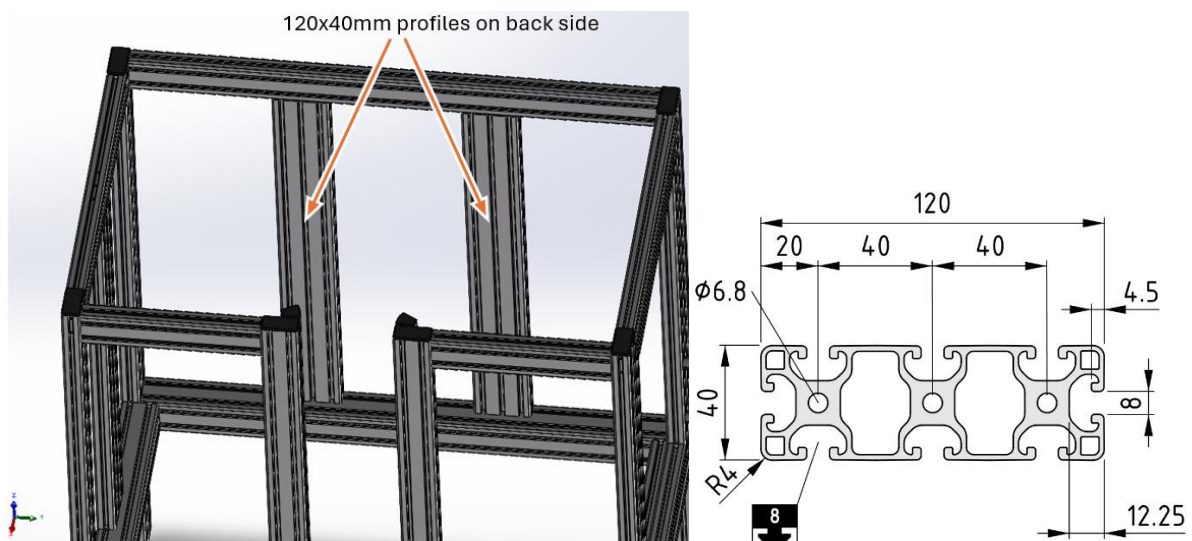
Vertical 120x40 mm profiles with integrated 40 mm channel for mounting wash/dry equipment.
